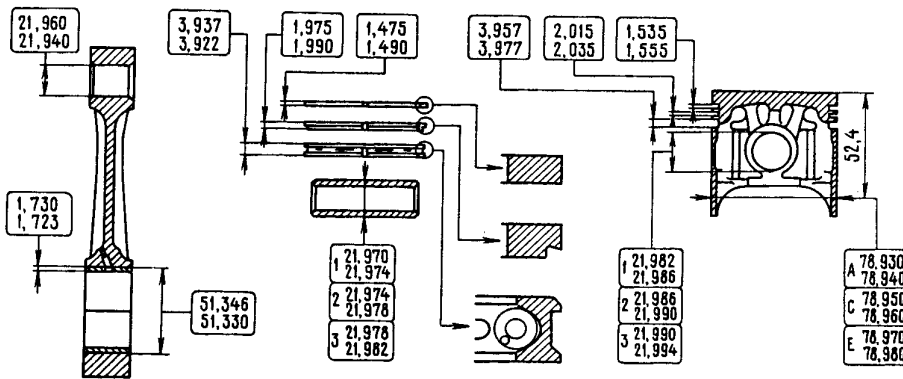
Main Dimensions of Piston, Connecting Rod, Piston Pin and Piston Rings
